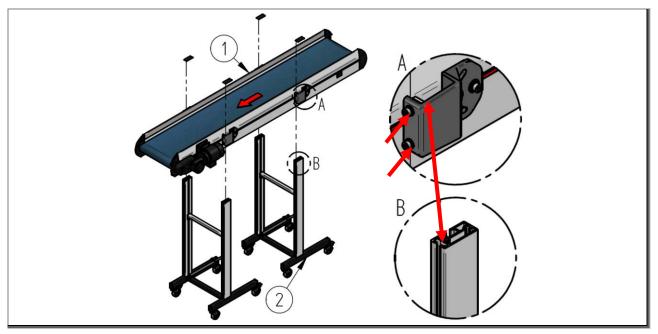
Assembly, conveyor with support HE 020 – HM 140 (typical)
